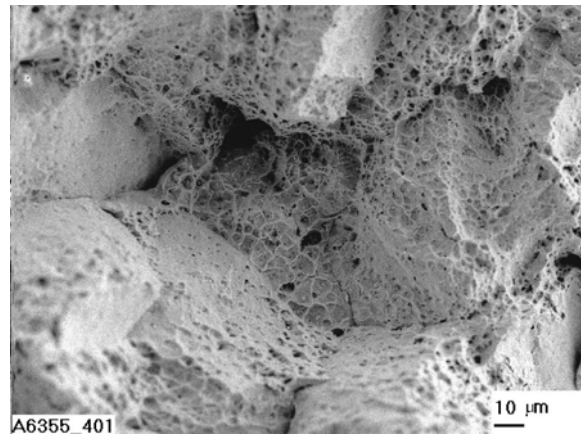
Detail image of the fracture surface showing the transgranular component and the intergranular component. Observe the general presence of ductile dimples.
